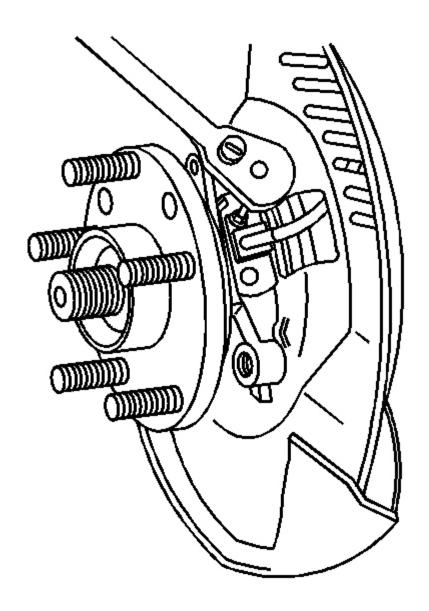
Removing/Installing Wheel Speed Sensor Mounting Bolt Courtesy of GENERAL MOTORS CORP.
